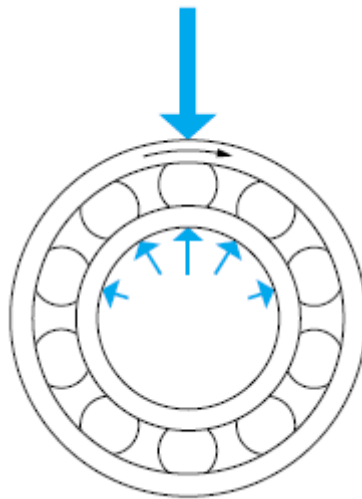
(b): Uni-directional radial load, fixed inner ring- rotating outer [94]
